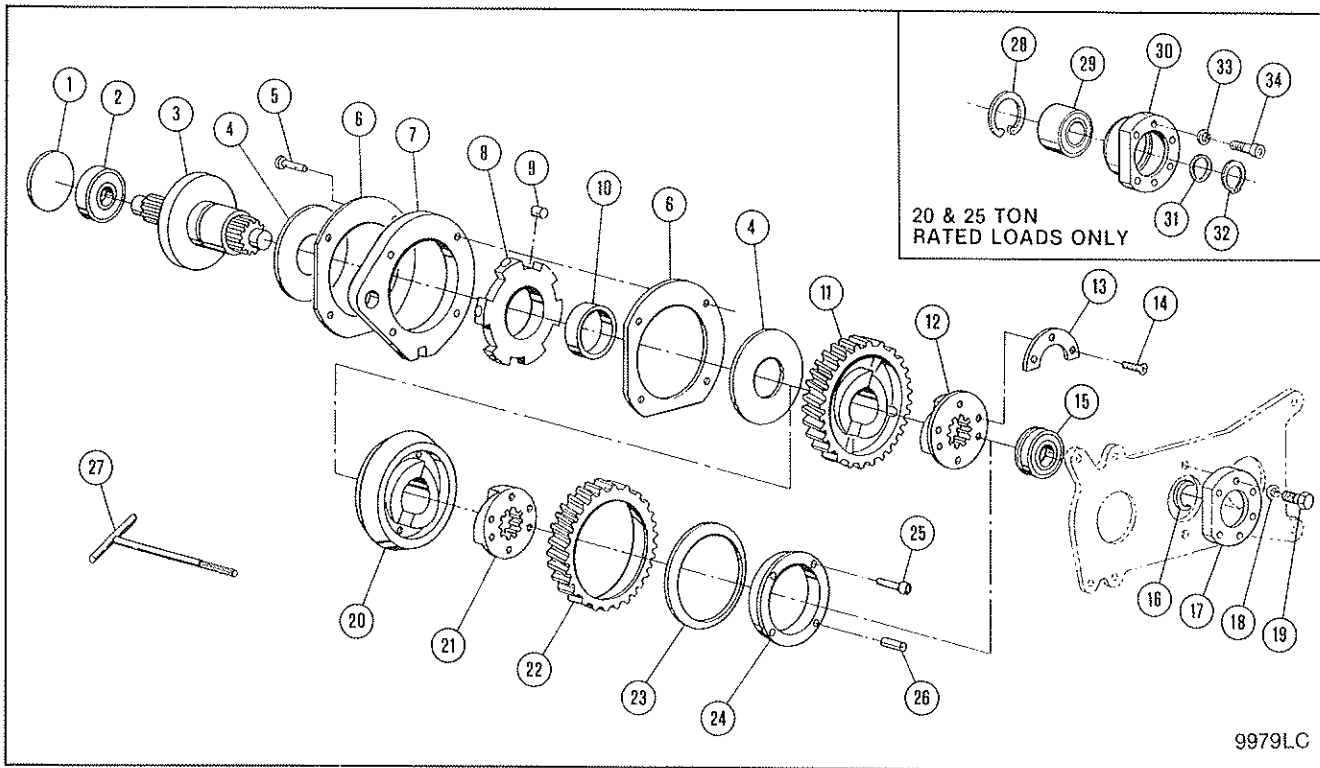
Mechanical Load Brake Parts (Includes Overload Clutch Parts).
